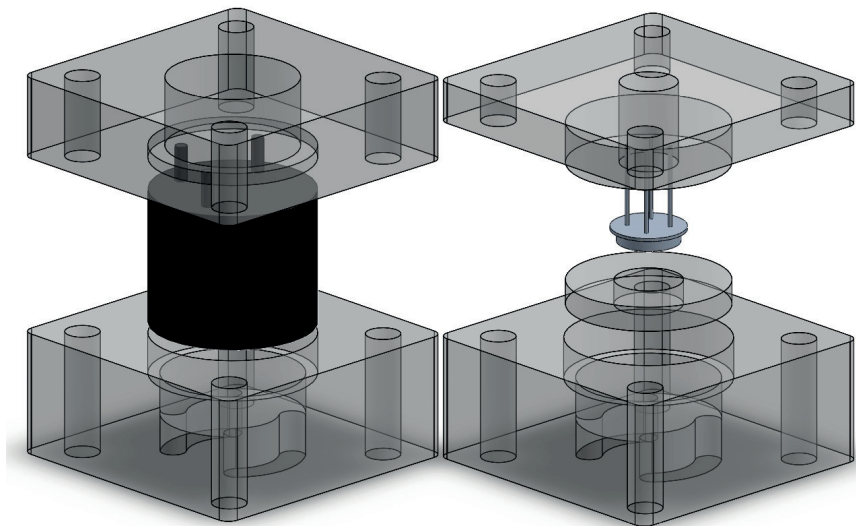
Two examples of sensor holders compatible with the single sensor platform. On the left is a typical electrochemical package shown in black (radius = 10 mm). On the right is a TO8 package shown in silver (radius = 4 mm). These are commonly used to mount metal oxide sensors.
